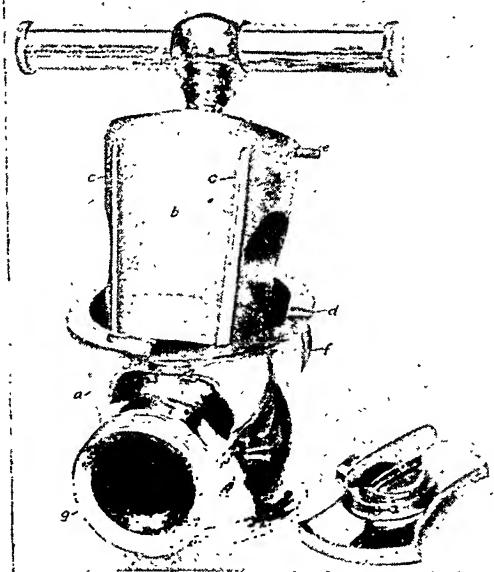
FIG. VI—Showing leak-protector inlet valve—(a) valve body; (b) valve plug; (c) leak drain grooves; (d-d) stops; (e) stop pin; (f-g) connections to inlet header line and holder respectively.
